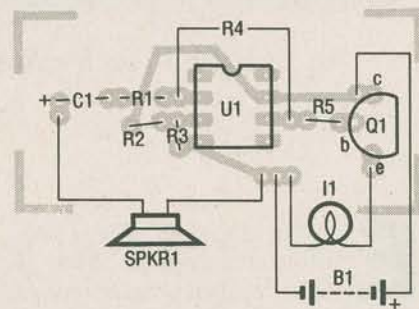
Assemble the transmitter's printed-circuit board using this parts placement diagram as a guide.
